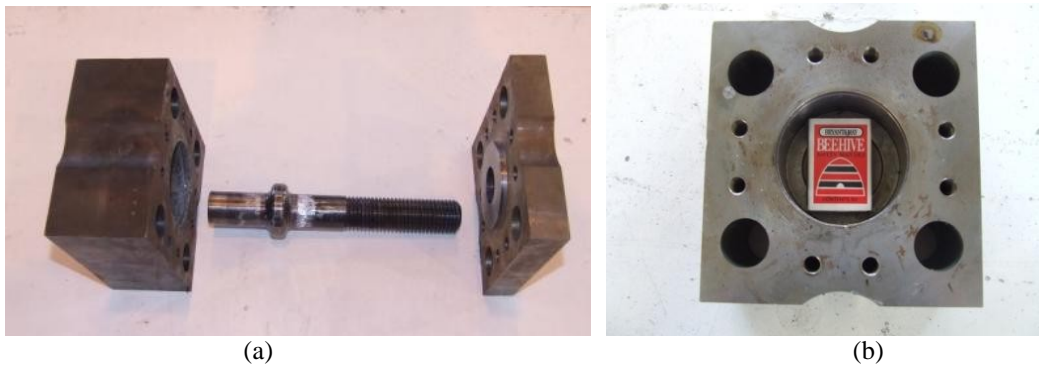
The lead-extrusion damper showing (a) the disassembled device and (b) the lead cavity.
